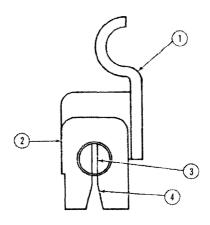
Timing Gear Cover and Governor Linkage Assembly
